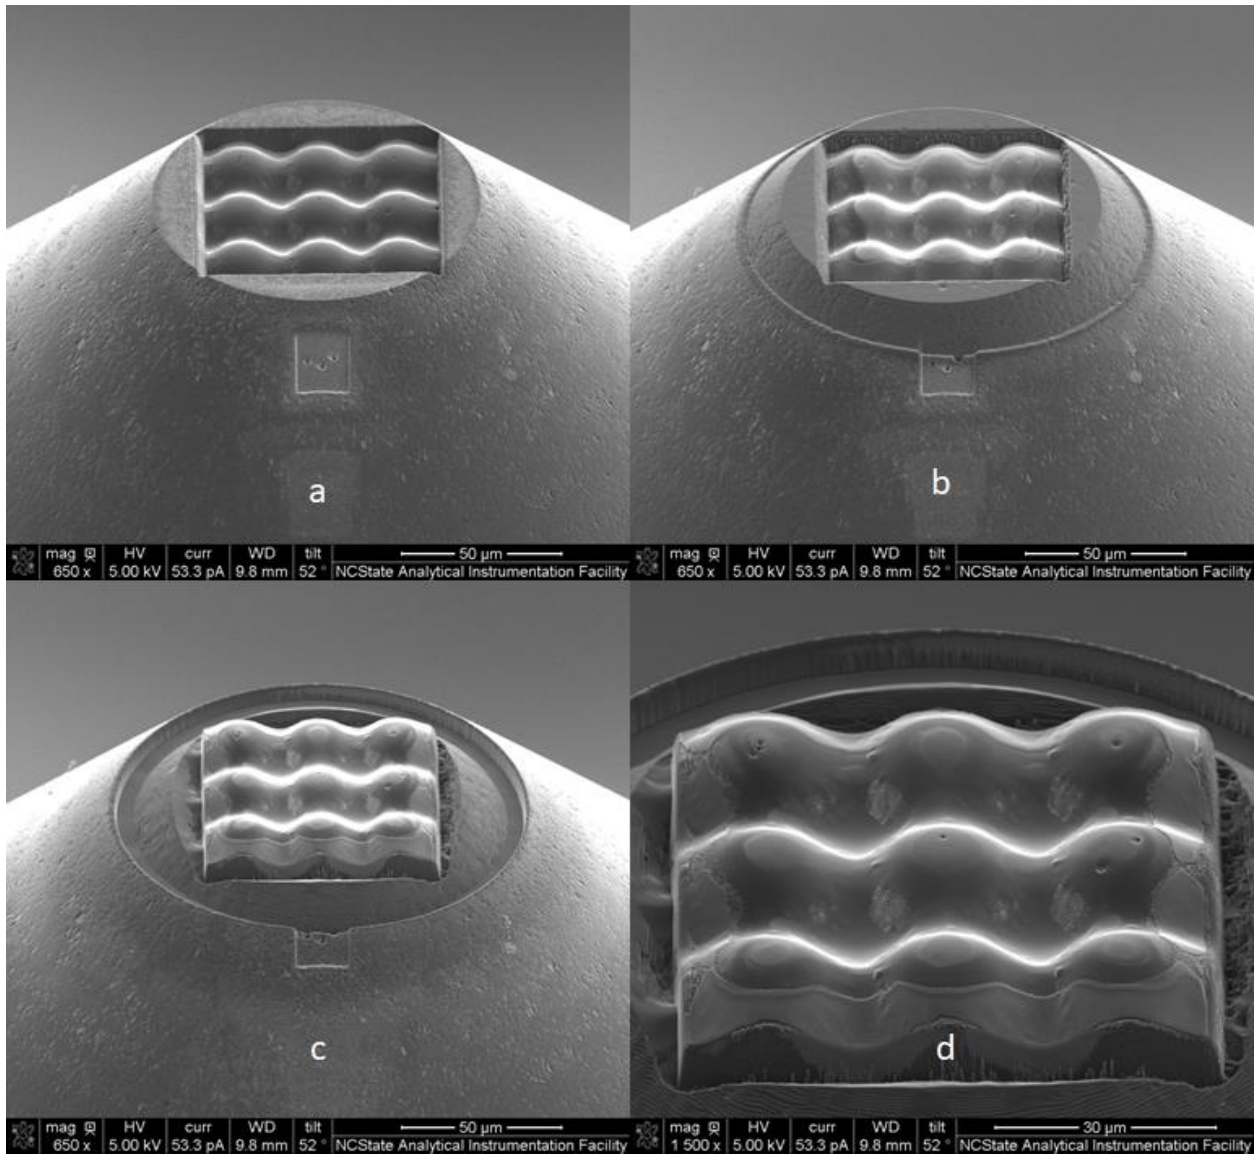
Completed FIB milled glassy carbon lens features (a), beginning of FIB milling the border (b), completed border (c, d)
